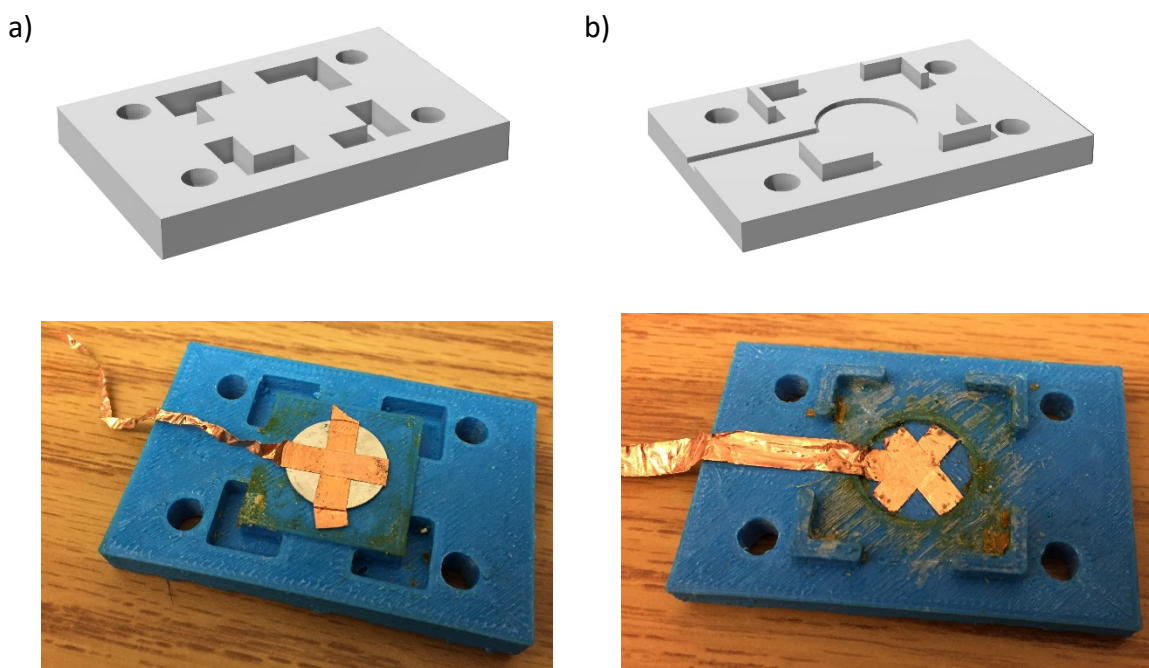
Holder (left: top part, right: bottom part) for GPE's EIS measurement.
